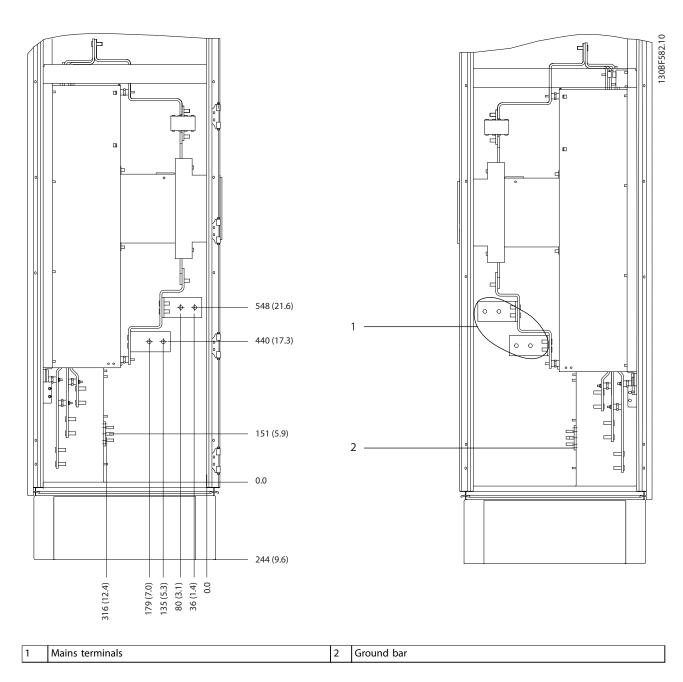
Terminal Dimensions for F11/F13 Options Cabinet, Side View
